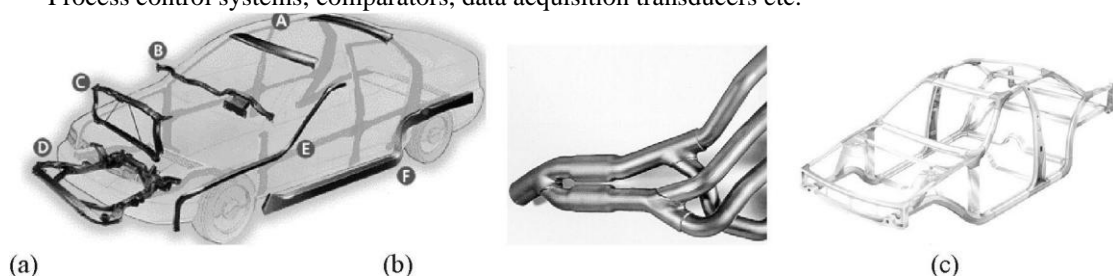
Represents few examples of parts produce by tube hydroforming in automotive applications.
